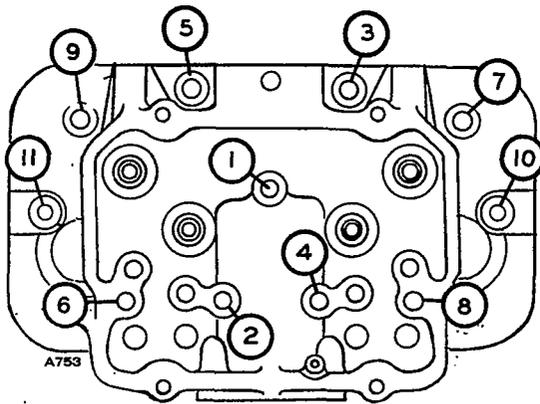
CYLINDER HEAD BOLT TORQUE SEQUENCE
